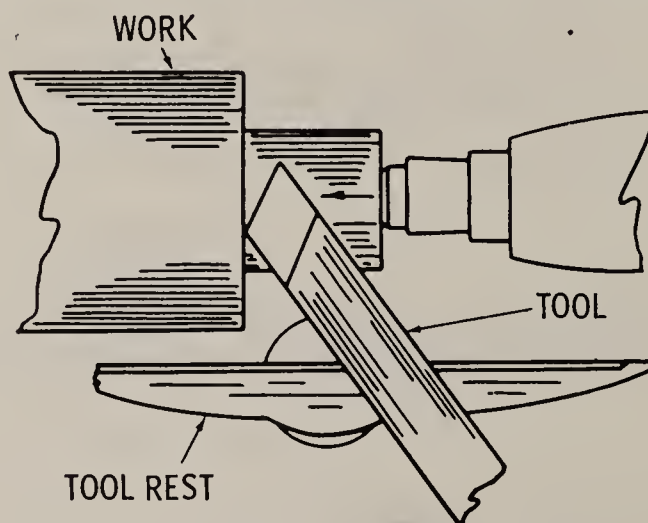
Cutting up to a shoulder with the small skew chisel. The arrow indicates proper direction for advancing tool.
